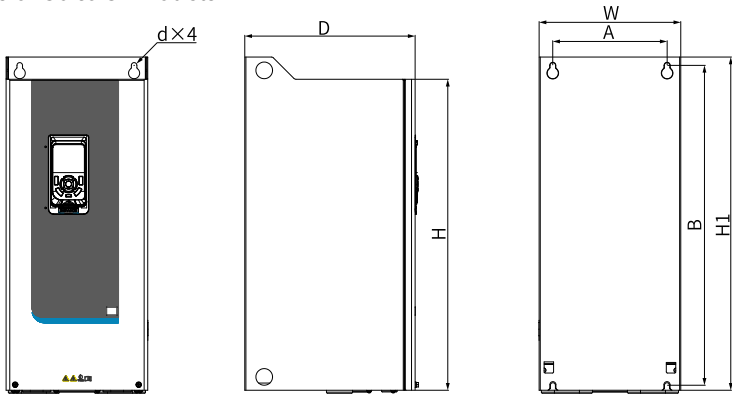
Outline dimensions and mounting dimensions of S6 to S7 models
